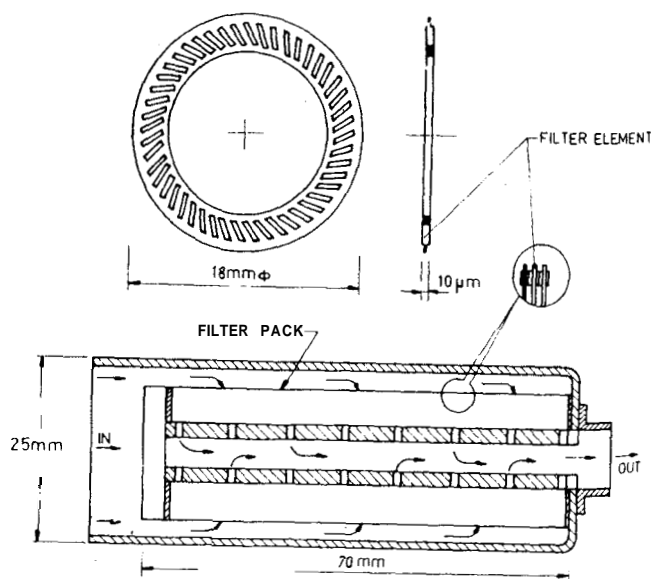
Sectional view of filter for hydrazine using etched stainless steel filter elements
